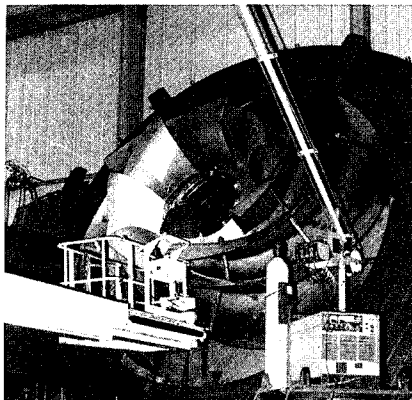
Crown - Vane Assembly On Welding Positioner
